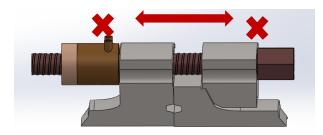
Bolt with rigid head Figure 6: Bolt stuck
